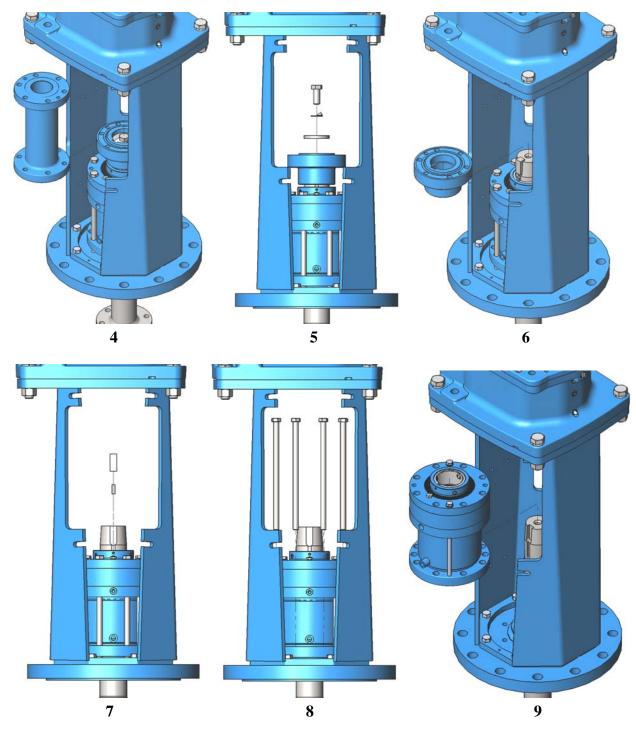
Vessel Mounting Nozzle/Pad Mechanical Seal Removal
